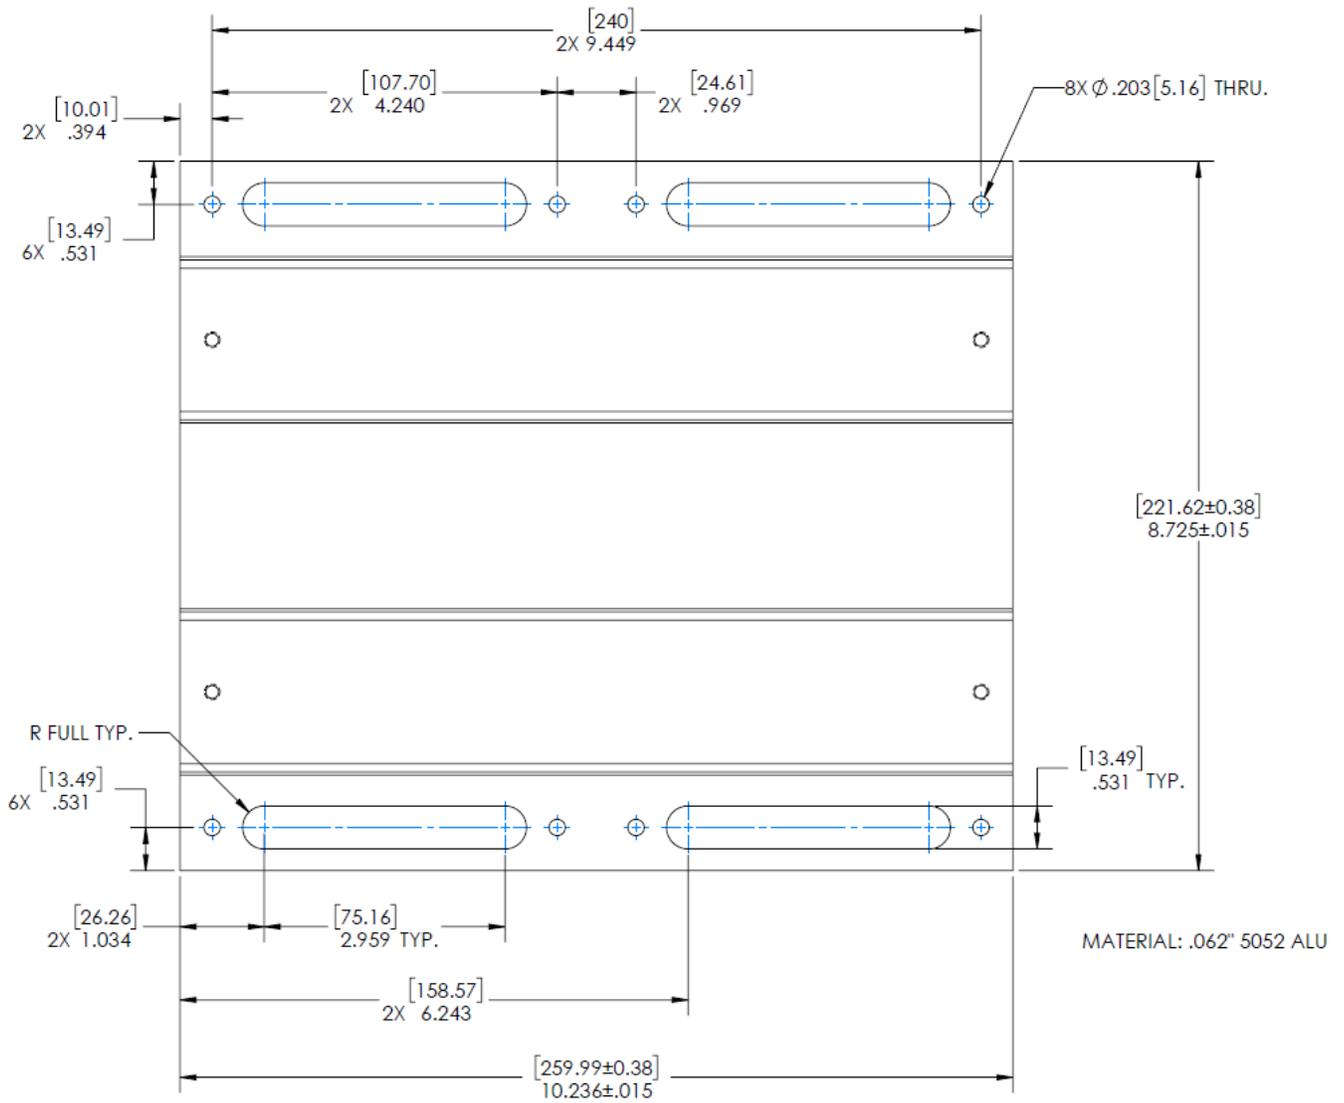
Model 8002-8 Aluminum Mounting Bracket Dimensions
